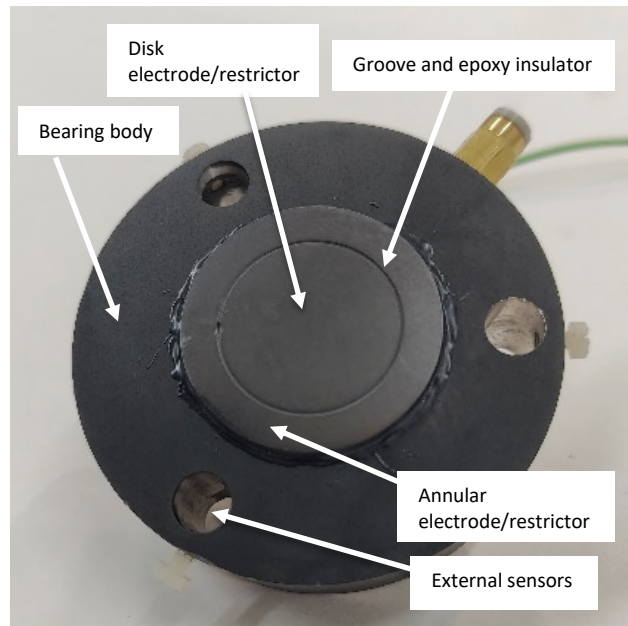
Investigated bearing. The body was anodized aluminium, with three bored holes for mounting external reference capacitive displacement sensors. The restrictor was constructed from two pieces separated by insulating gap with a 0.5 mm groove to prevent the epoxy from creating a high spot in the surface of the bearing.
